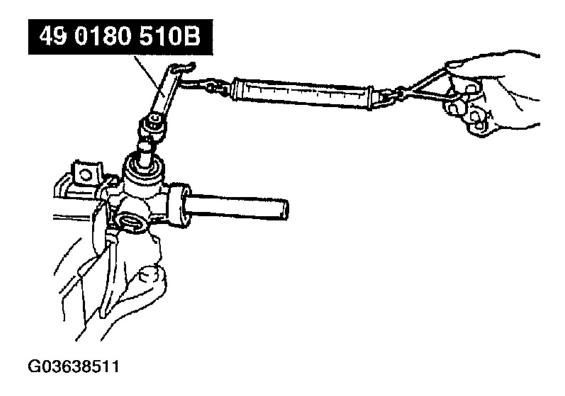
Measuring Pinion Torque Courtesy of MAZDA MOTORS CORP.
